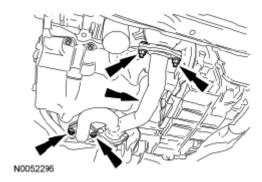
Locating Exhaust Flexible Pipe Nuts Courtesy of FORD MOTOR CO.
